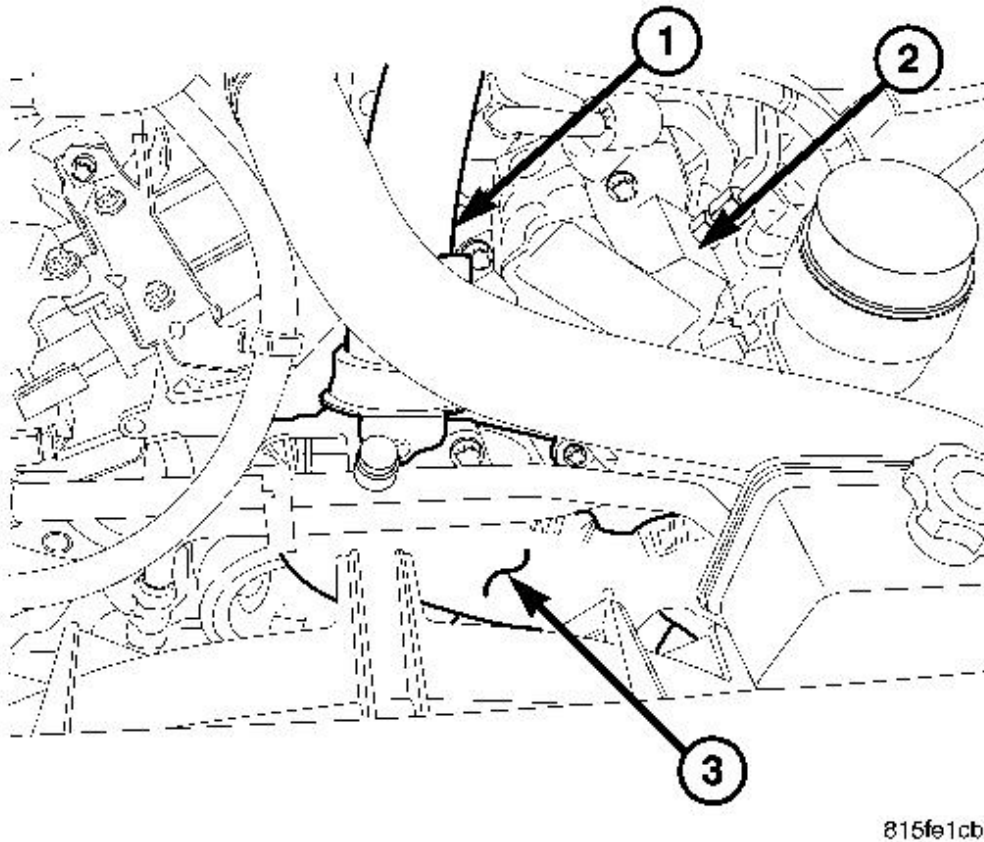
Charge Air Cooler Inlet Pipe, High Pressure Injection Pump & Charge Air Cooler Inlet Resonator
